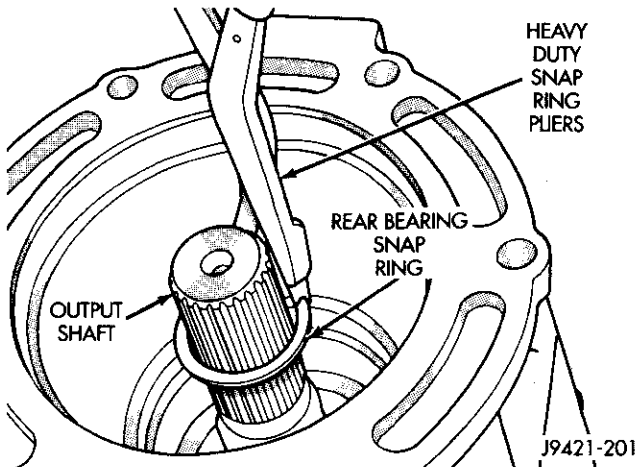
Rear Bearing Snap Ring Removal—4WD
